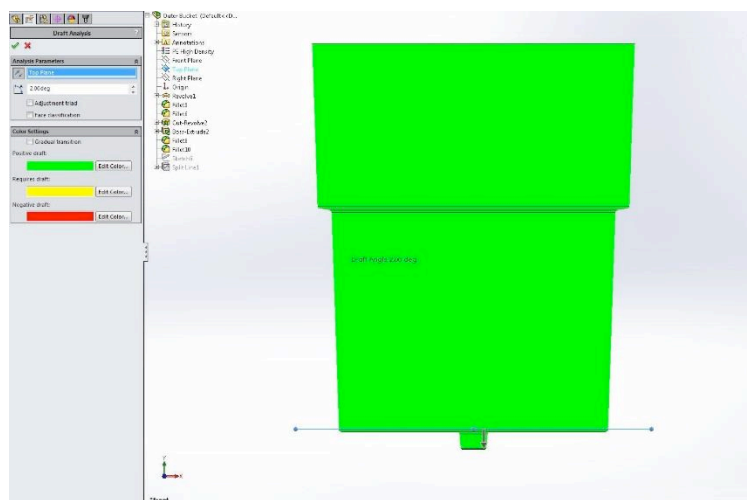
The shell can be molded in a 2-part mold. Draft analysis shows the shell has appropriate draft angle for molding.
